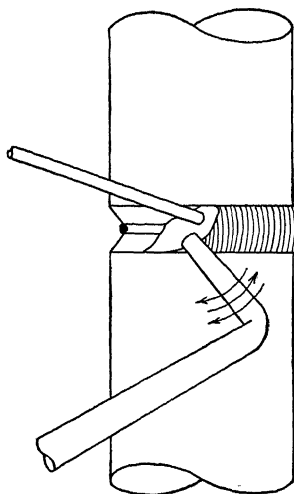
Horizontal pipe weld, forehand method.
